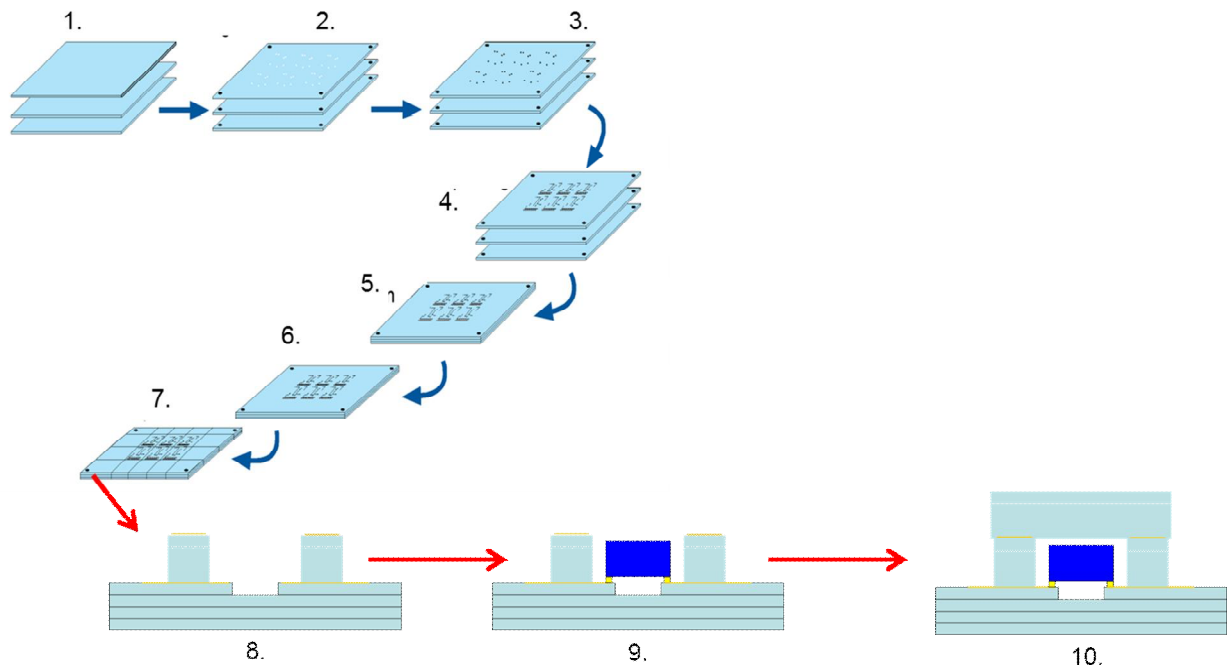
LTCC module fabrication steps from sheet cutting to hermetic sealing. The first step is ceramic sheet blanking. It is followed by via punching (2.) and via metallization (3.). The next steps are conductor printing and cavity punching (4). These are followed by layer alignment and lamination (5.). The last step in actual LTCC fabrication is sintering (6.). Post-processing steps include dicing (7.) and component or module separation (8.). Surface Mount Devices (SMD) and other chips are then assembled to modules (9.). The last step is to seal cavities or package LTCC modules (10.).
